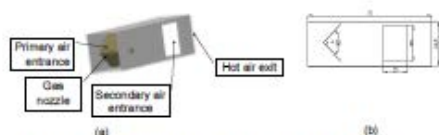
Design: gas heater, 3D-dimensional (a) and longitudinal view (b).
